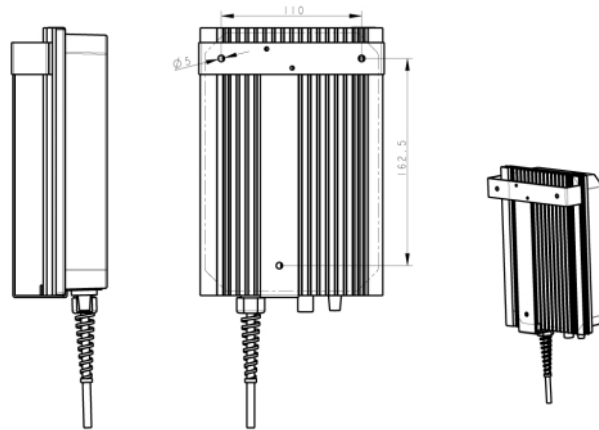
Dimensions and specified installation layout of the Gridfit 250 inverter.
